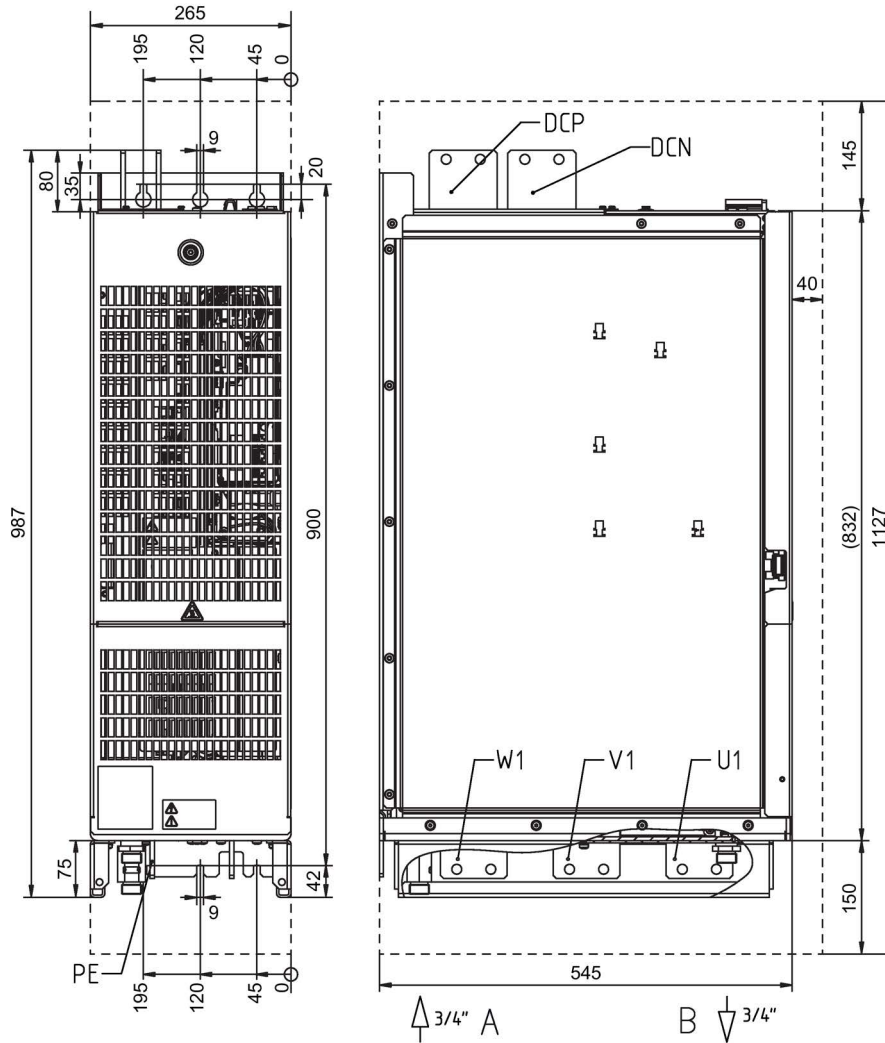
Dimension drawing Active Line Module, frame size HXL Front view, side view
